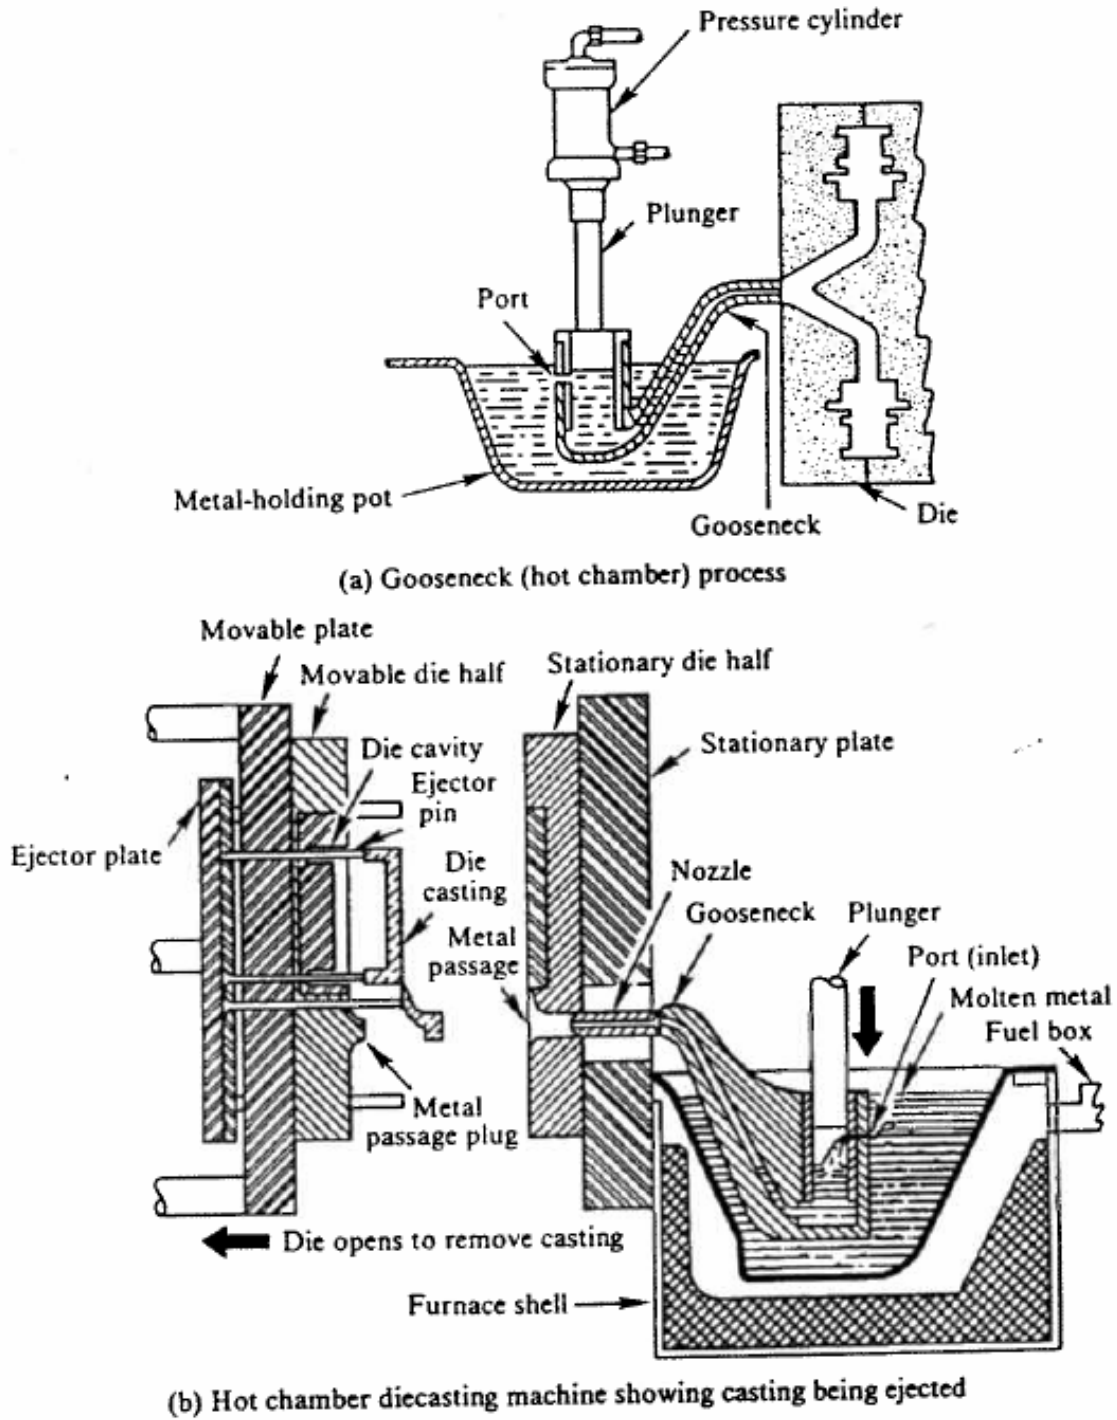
Hot chamber diecasting process and machining. (Bradley, 100)
